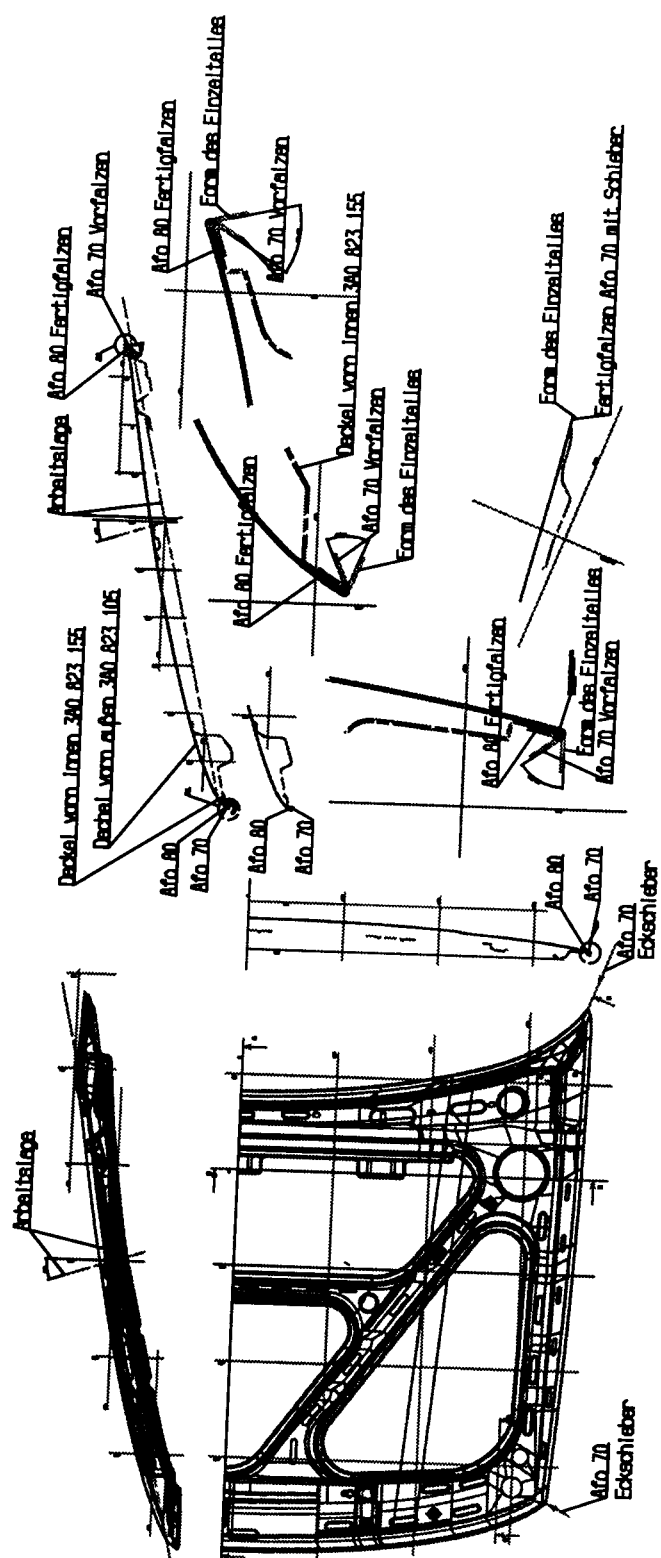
Technical drawing representing the fold plan of the outside panel
